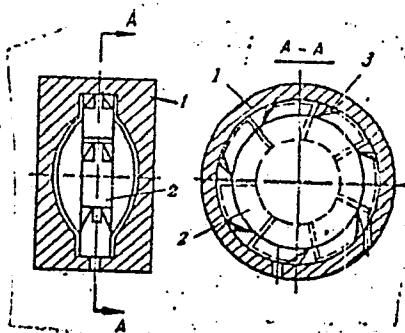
1 - turbine casing; 2 - rotor; 3 - blade
